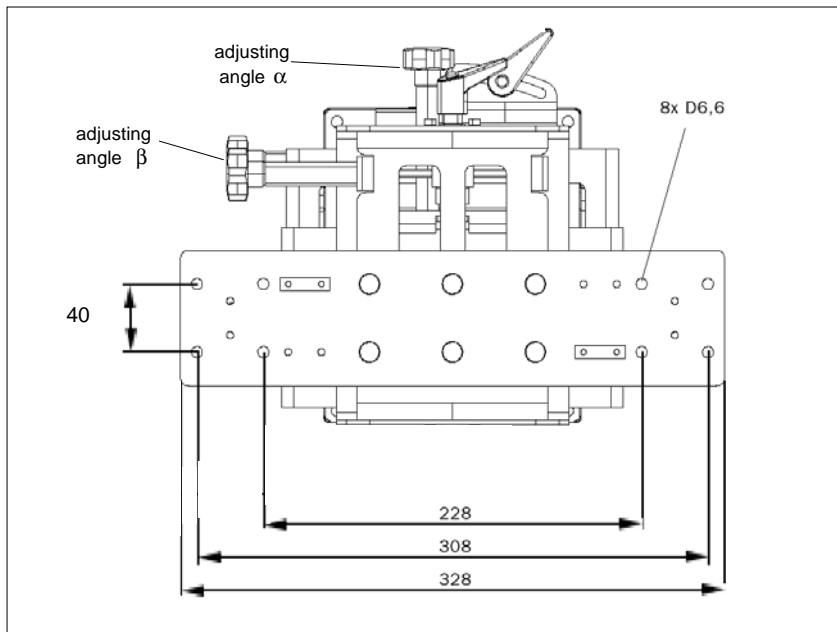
Dimensional drawing for Mounting Set with LMS 200
